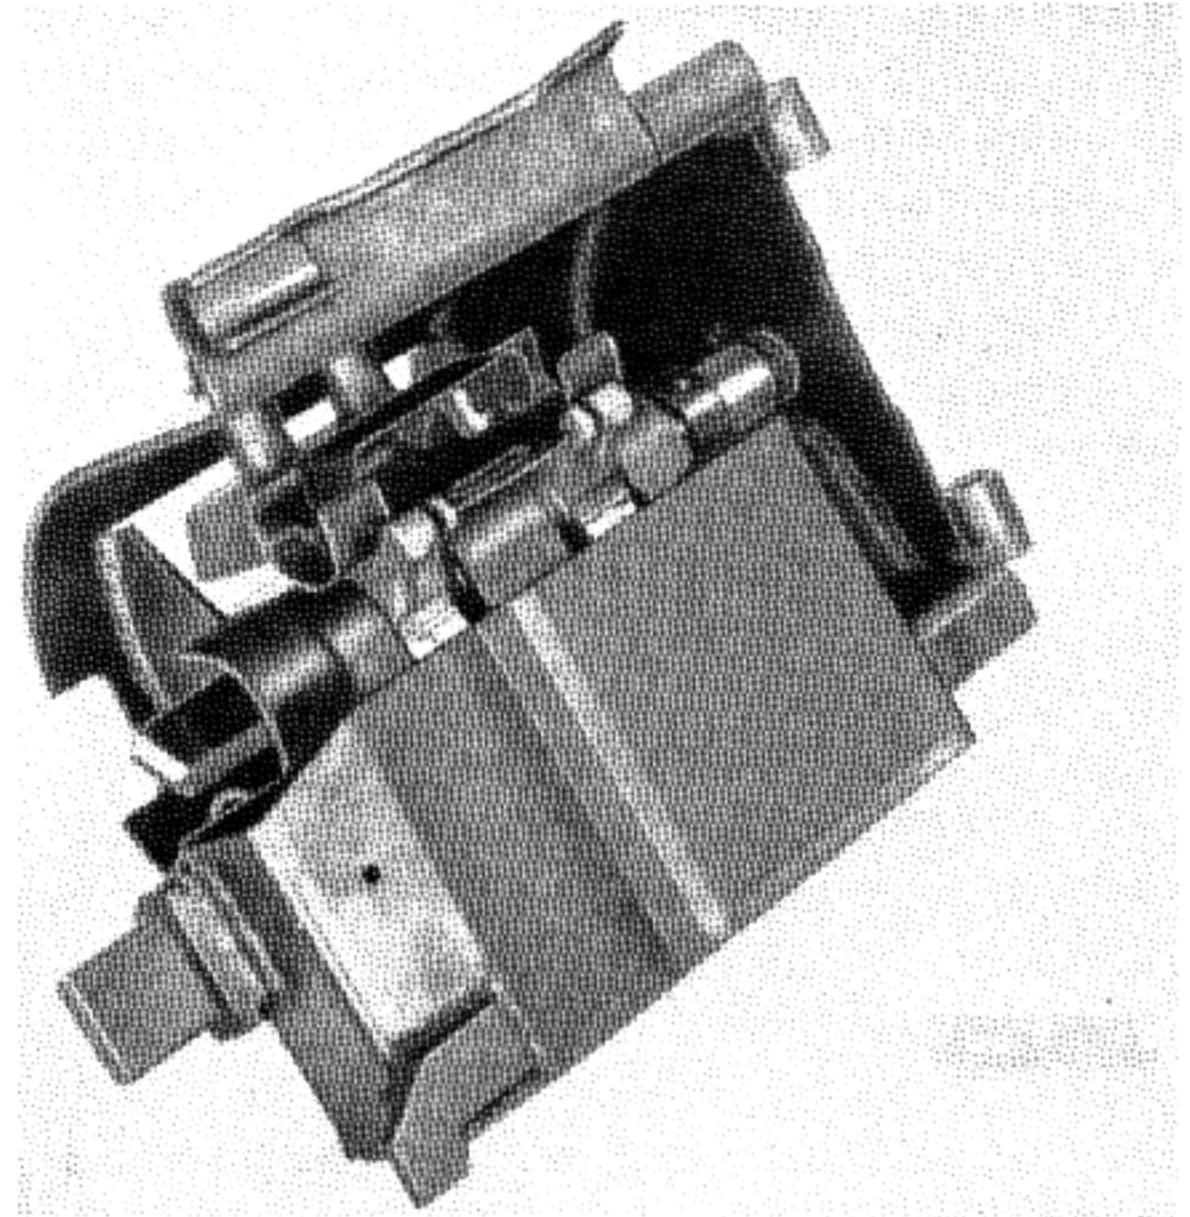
Feed mechanism of 30-mm British Aden Gun. Bottom view showing a link entering the feed chute guide.
